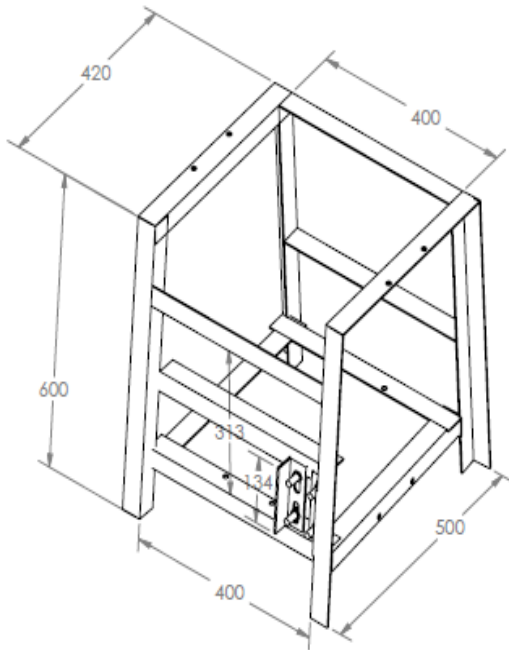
Frame of the maize sheller prototype (all dimensions in mm)
